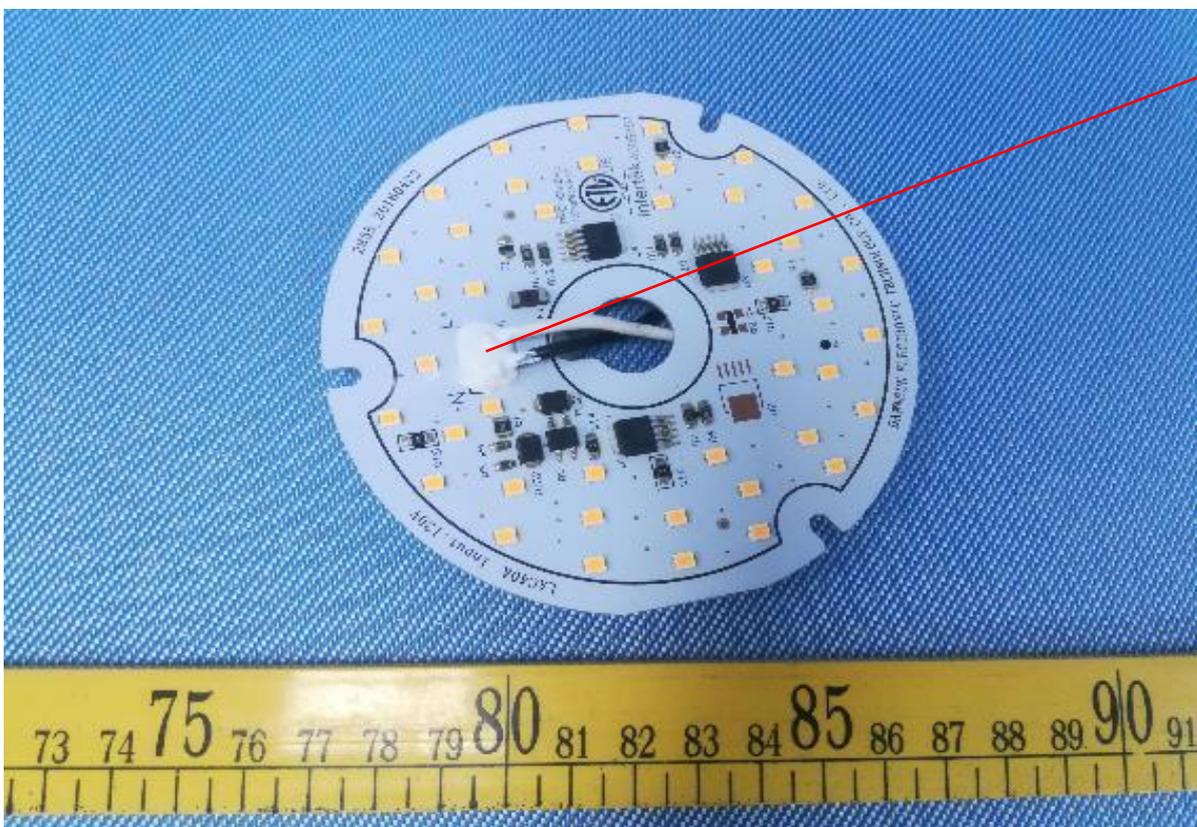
Internal view of Ceiling Fan, model KBS-5226
